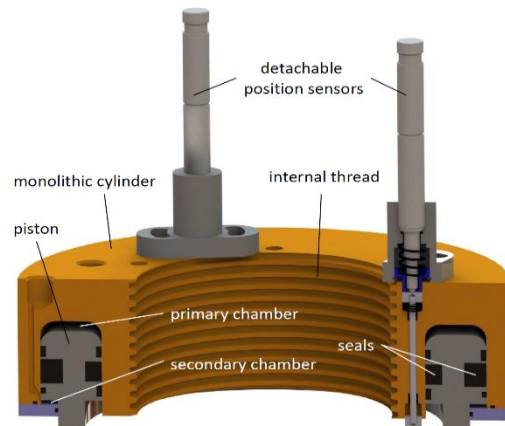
Cross-sectional view of a newly developed anchor lock-off testing equipment specialised for threaded anchor heads
